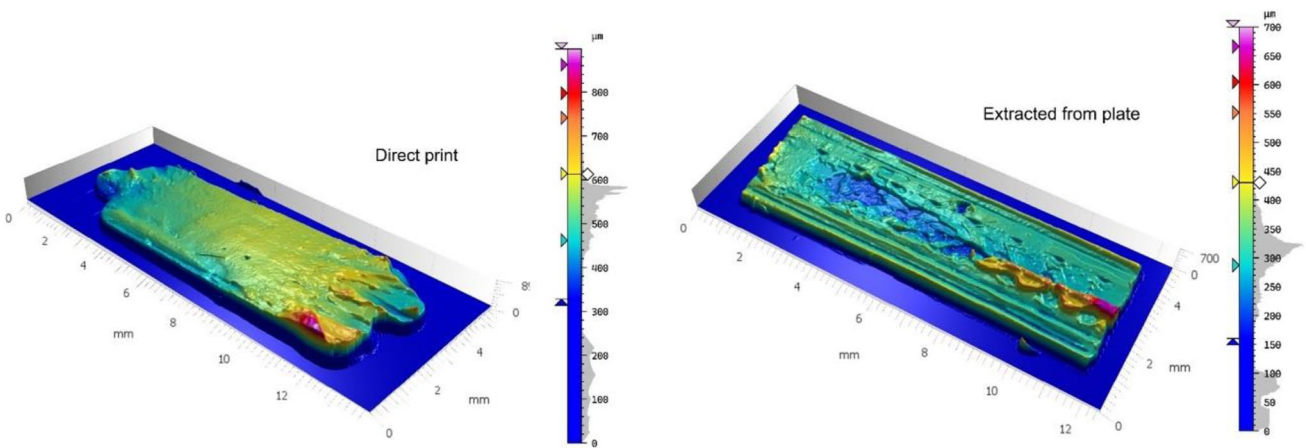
3D analysis of the fracture surfaces showing a directly printed sample and b cut sample both under “as-printed condition”
